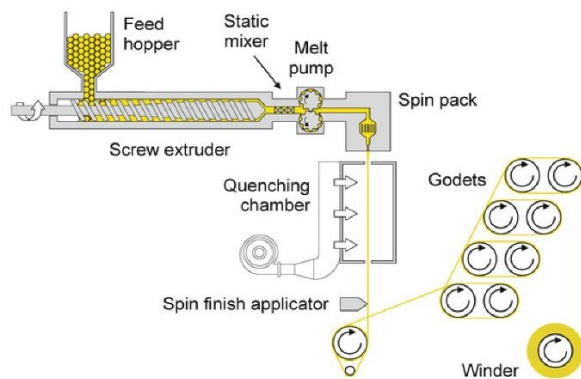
Schematic diagram of a typical polypropylene rope extrusion line showing feed, melt, die, cooling, and drawing sections.
